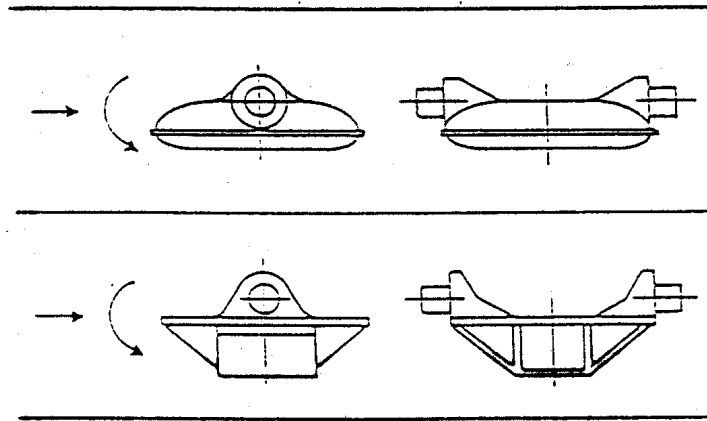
Casted blade design compared with fabricated open frame blade of the Lattice blade butterfly valve
